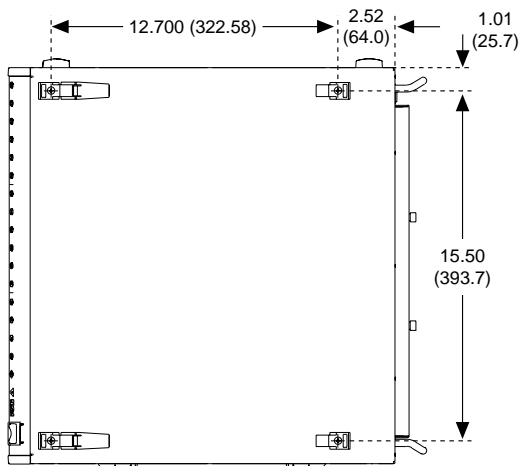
PXI-1045 Bottom Dimensions in Inches (mm)
